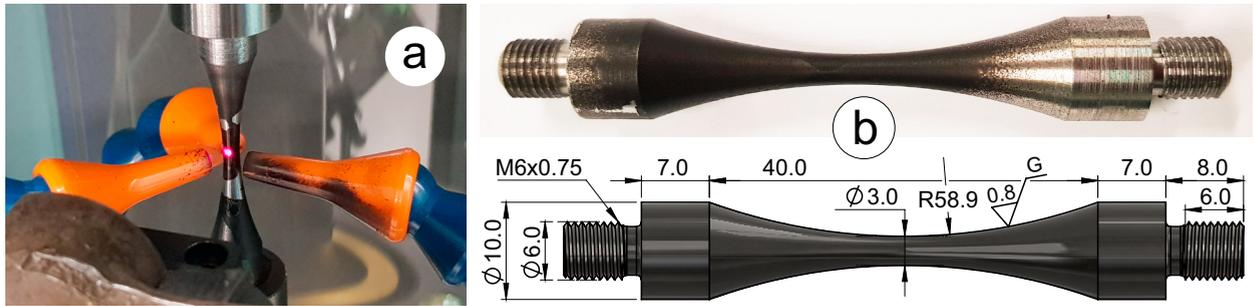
Specimen for ultrasonic test: a) inserted in UFS-2000A with temperature measurement spot; b) solid model with dimensions and manufactured and painted.
